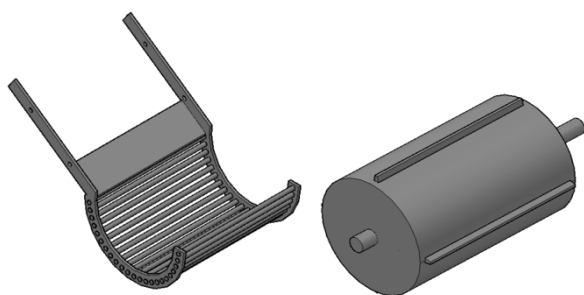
(A) Shelling concave assembly and (B) cylinder drum design
